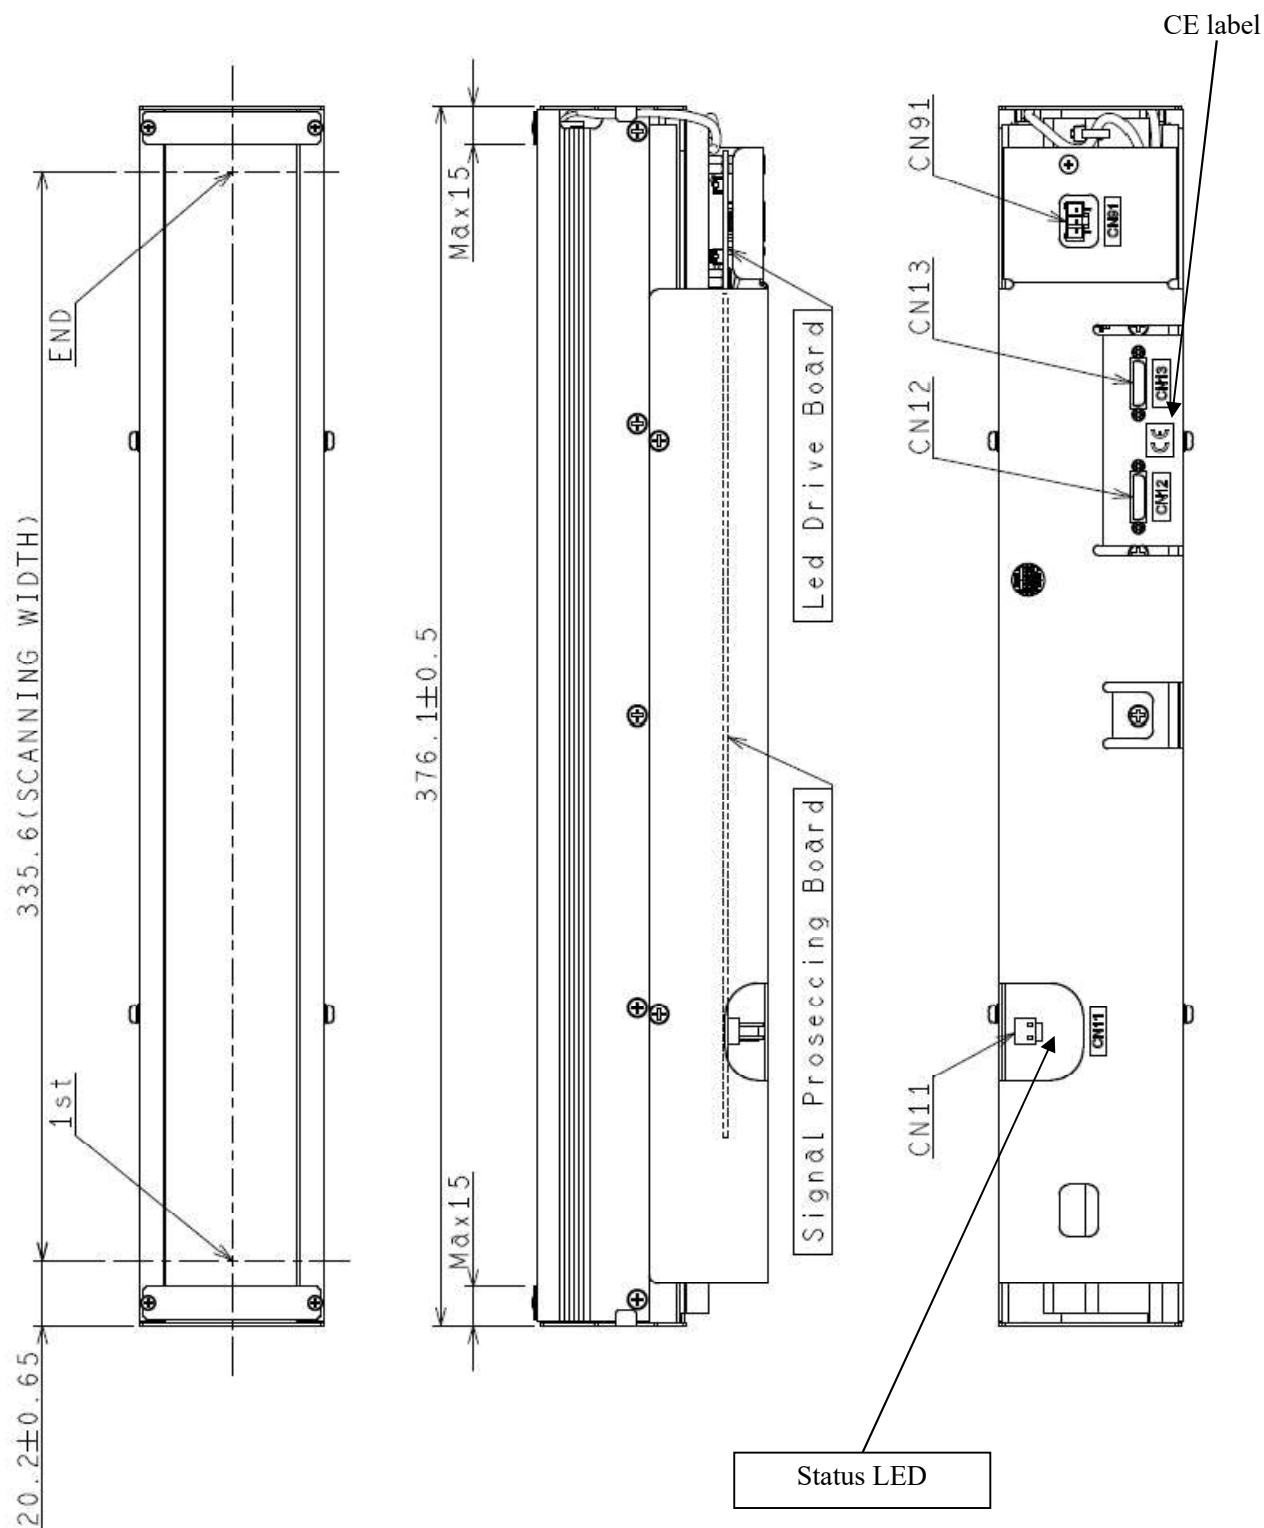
KD6R335AX4 Outline drawing (at 24°C)
